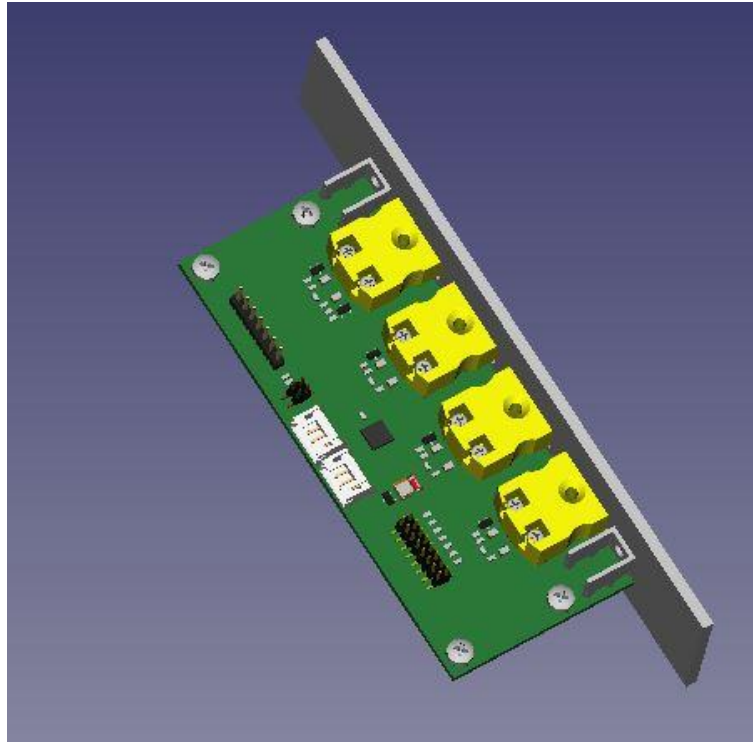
The PCB mounts to the base; the connector attaches to the panel.
